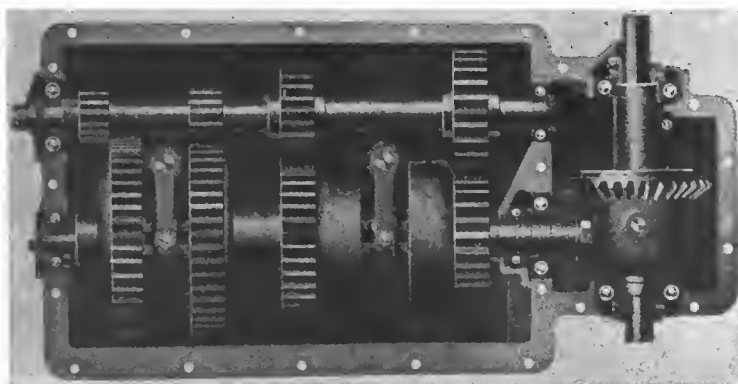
Thrust of bevels taken on bearings of collar type.
